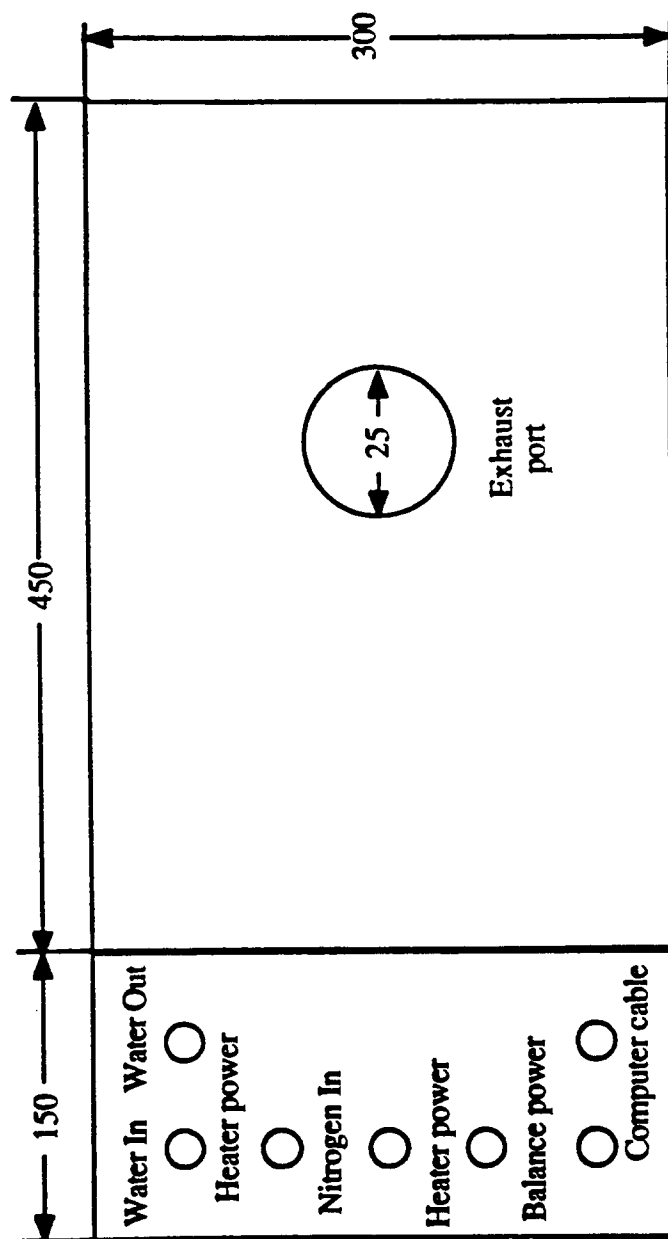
Cover plates for simulated fire apparatus (all dimensions in millimeters)
